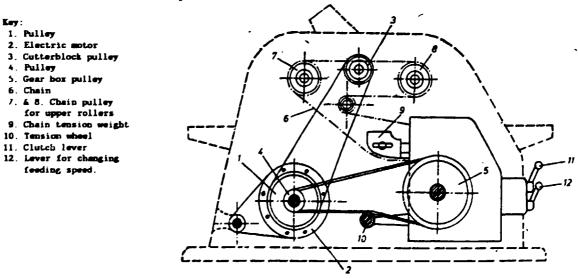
Transmission of power to feeding rollers and cutterhead in a thicknesser.
